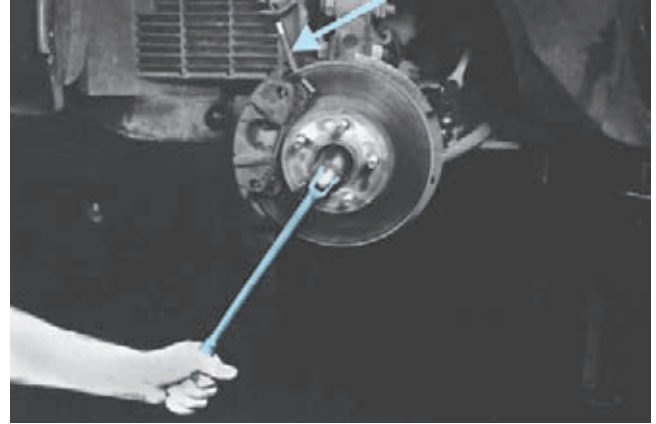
Once the hub nut has been loosened, the wheel can be removed to allow access for removing the hub nut and other parts. Note the pin to hold the rotor from turning (arrow). (Courtesy of NEAPCO)
